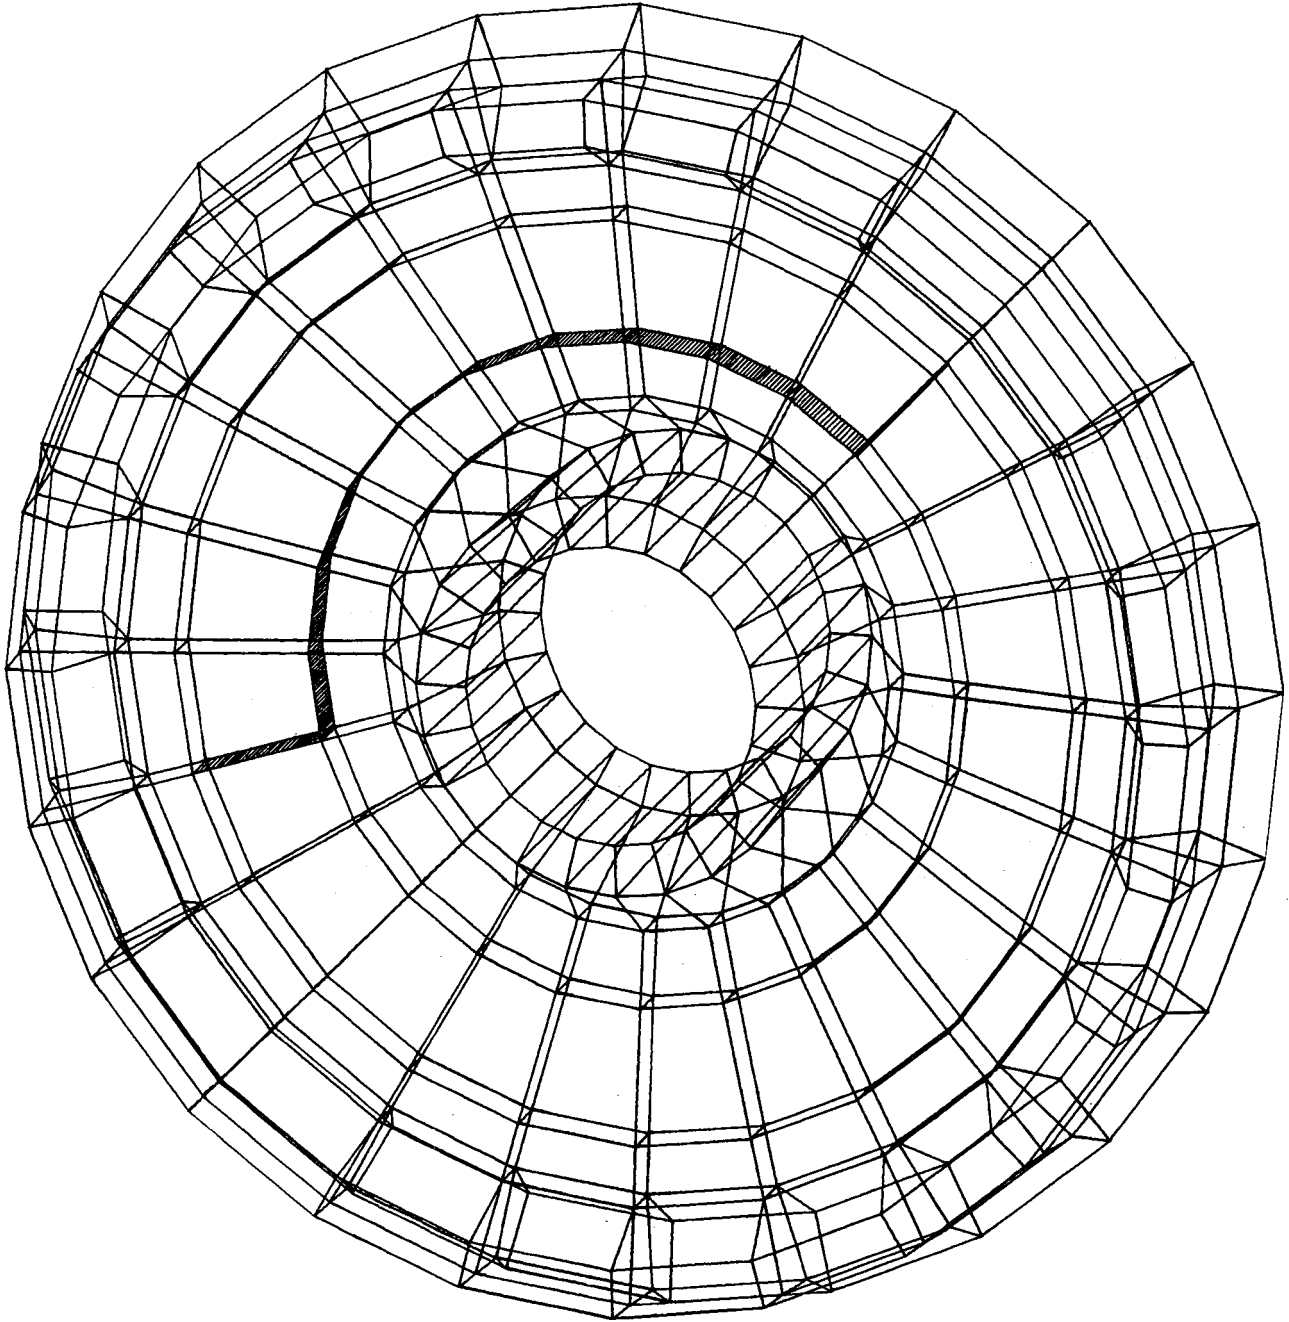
,7 Sketch of Cracks in Wheels 4G & 4B
